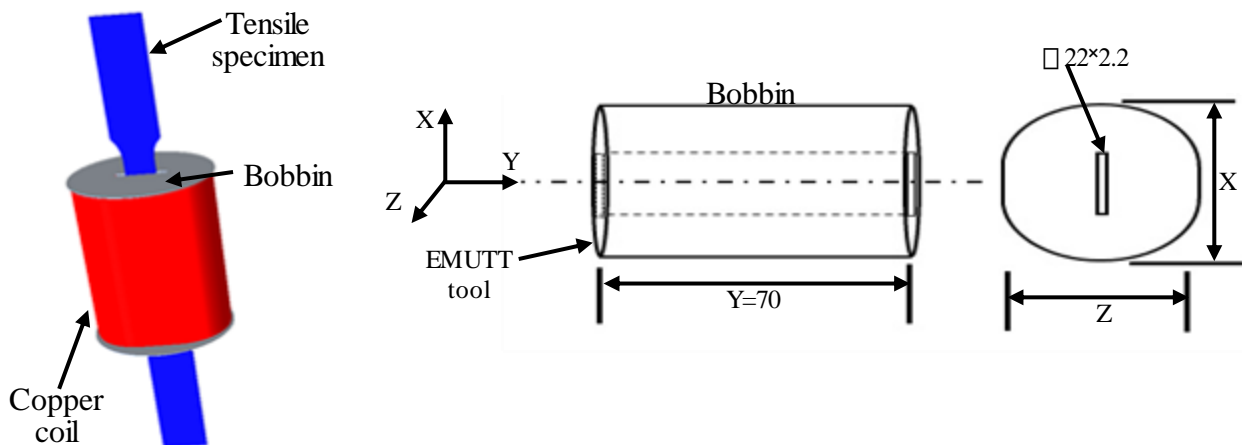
Final dimensions of bobbin design for EMUTT tools.
